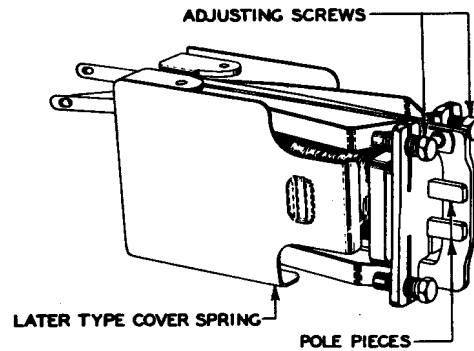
J-type Relay Equipped With Later Type Cover Spring
